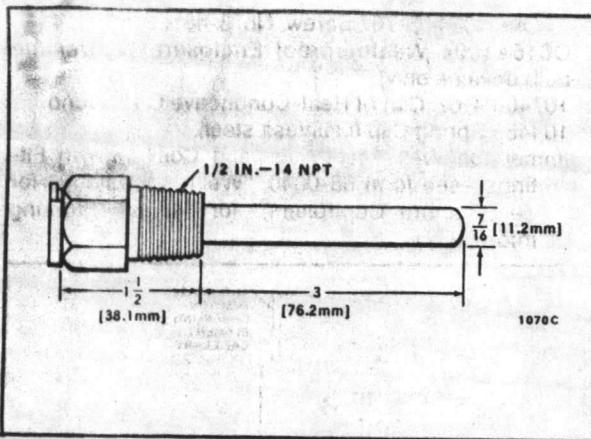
IMMERSION WELL DIMENSIONS FOR ALL MODELS EXCEPT L4006C AND L6006B.
